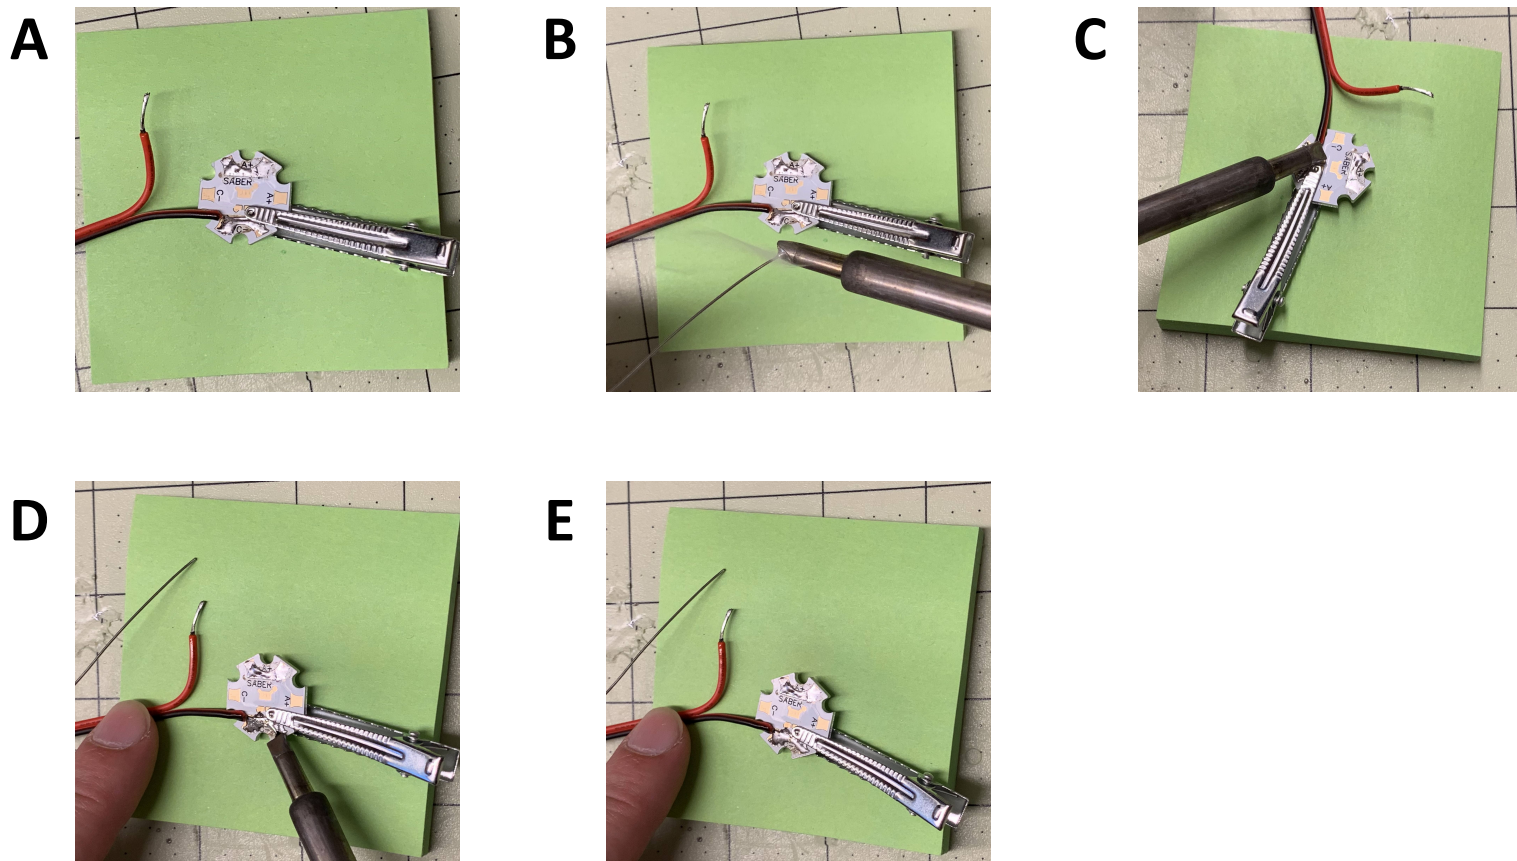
Soldering wires and LED onto the LED base Part 2. (A) A tinned wire clipped to the contact using a hair clip. Note that the black wire is soldered to the cathode “C-” (B) Addition of a generous amount of solder to the the soldering tip. (C) The soldering tip pressing down on the wire, melting the solder on the LED base and the wire. (D) Holding down the wire so that it stays put when the soldering iron is removed. (E) Holding the wire in place until the solder hardens.
